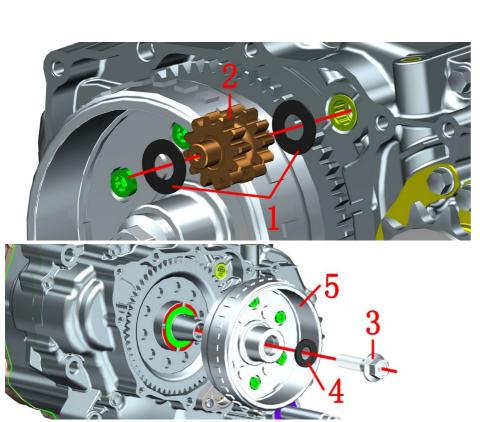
LEFT CRANKCASE		Disassemble the bridge teeth and the magneto rotor	CHK
